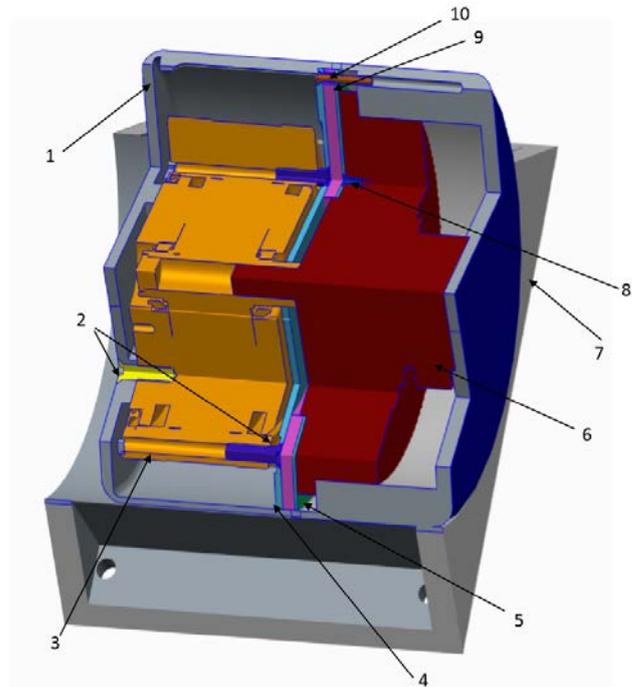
Cut joint robot 1) First Leg, 2) screw M12, 3) transmission TS240 4) flange gearbox, 5) motor flange, 6) engine, 7) base 8) M4 screws, 9) sealing rubber, 10) screw M6
